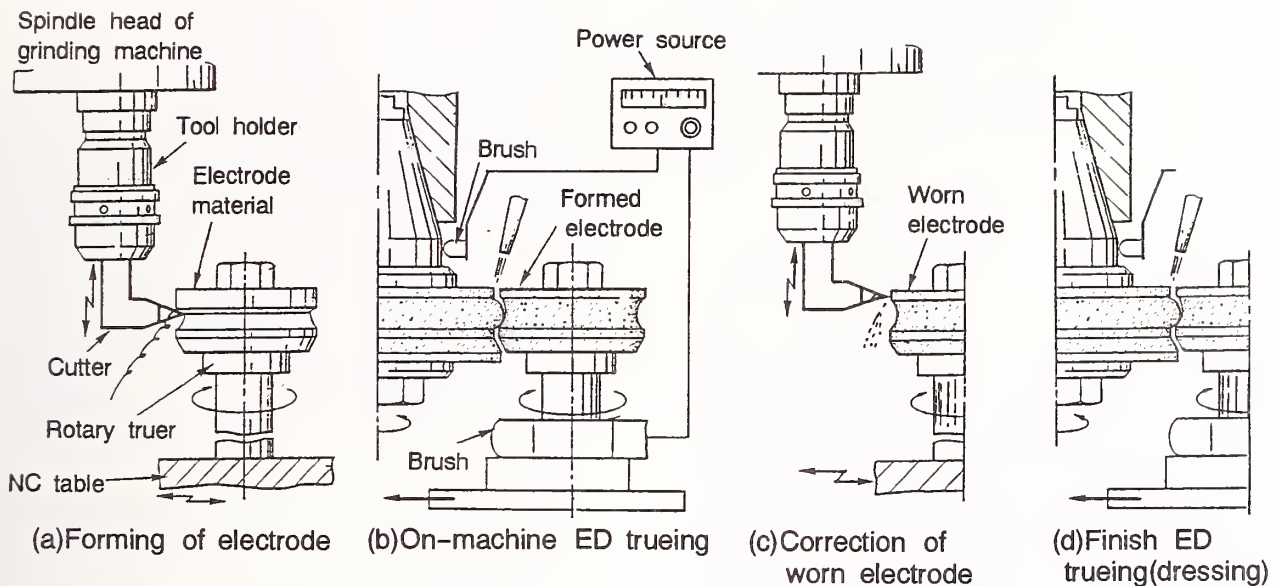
Procedure of the on-machine ED trueing method with on-machine electrode forming.
